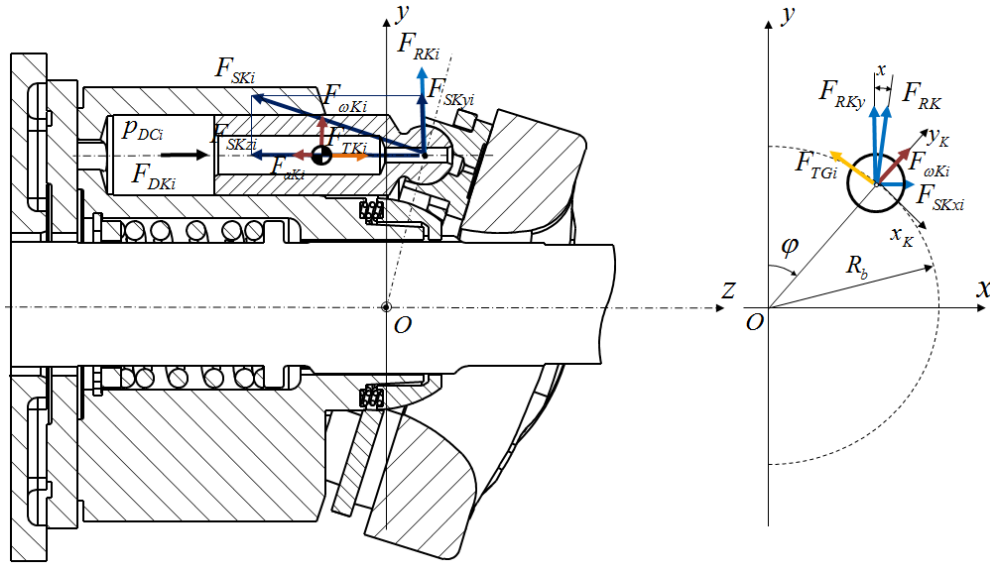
Piston/Slipper Assembly Free Body Diagram.
